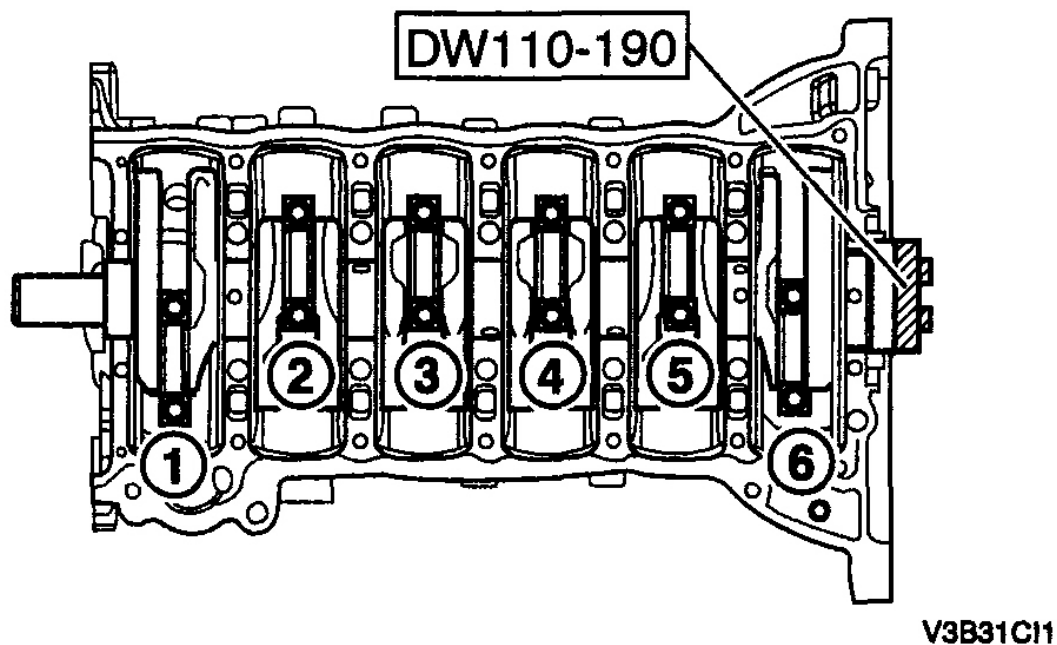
Tightening Connecting Rod Cap Bolts Using Crankshaft Adjuster DW110-190
